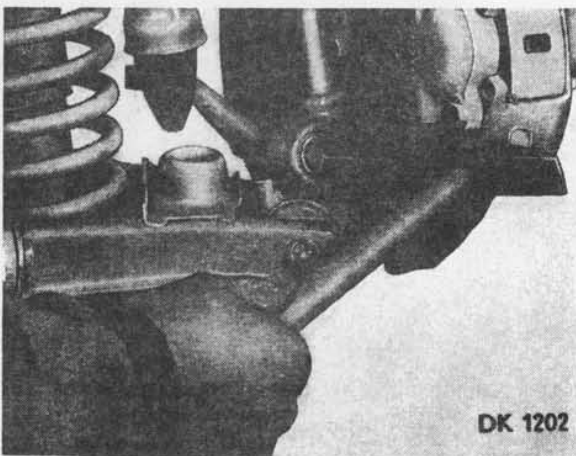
/6 - Driving Out Steering Arm Using MP 6-105 Cartridge
